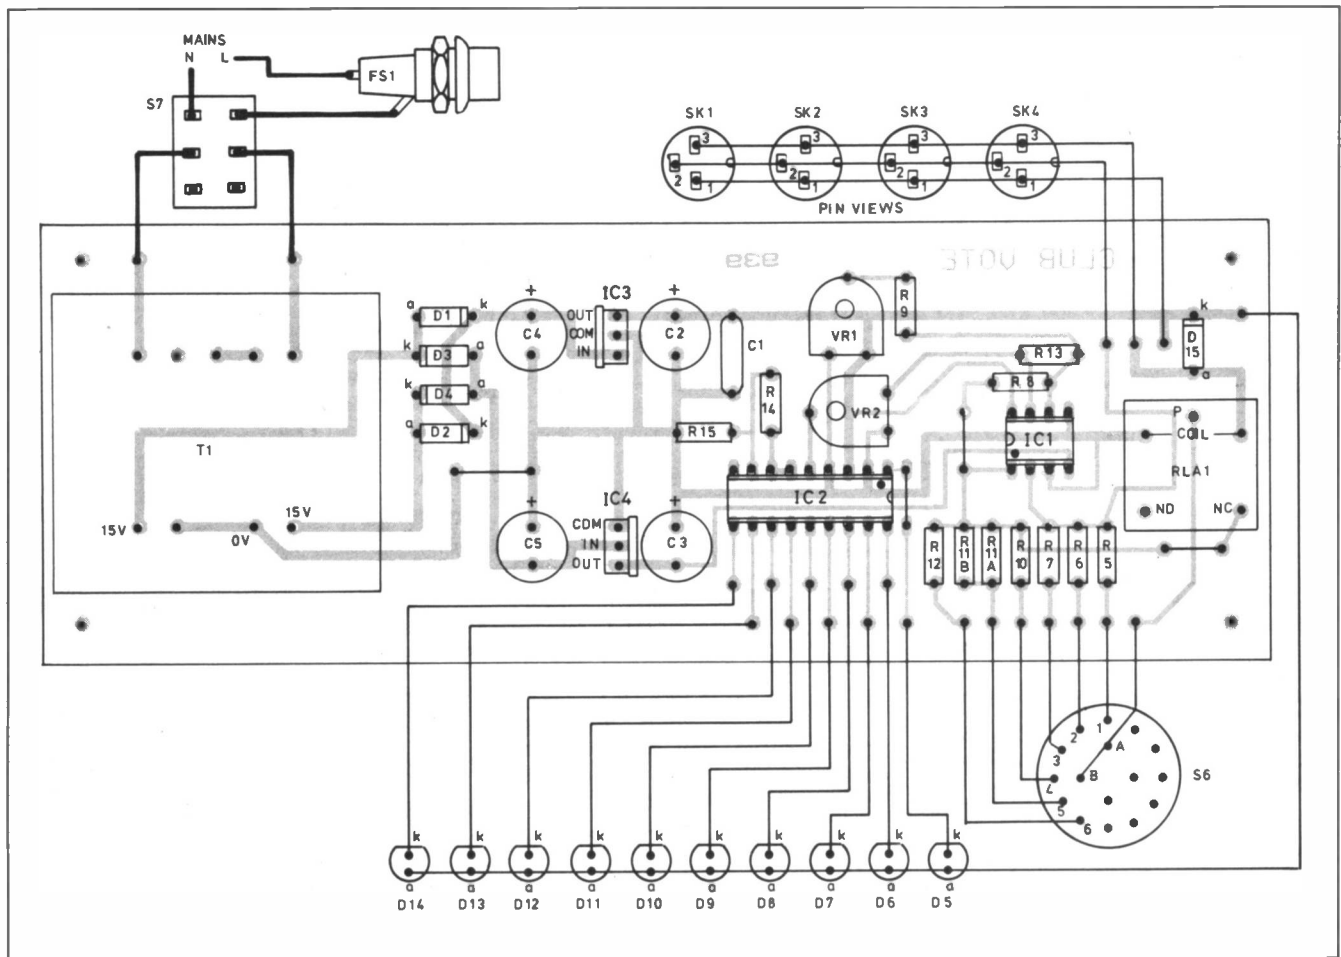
Printed circuit board component layout and wiring diagram for the Club Vote Totaliser controller.
